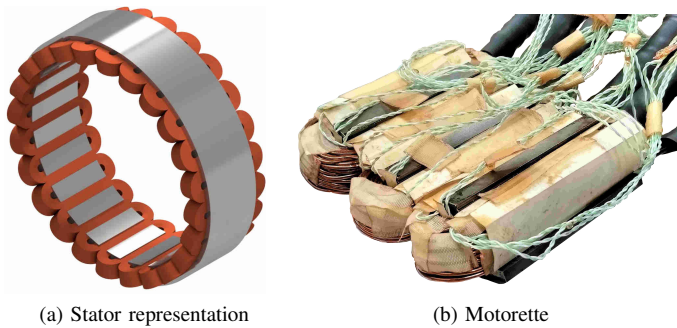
Computer Aided Design image of double layer modular wound stator investigated and subassembly test prototype of stator winding system manufacture.
